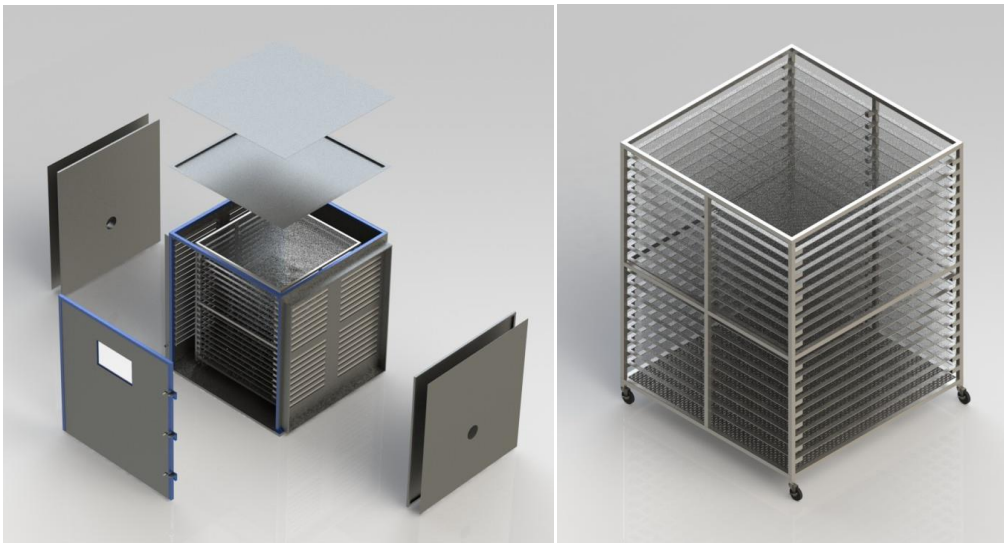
a) Parts of the drying chamber and b) tray trolley with wheels
